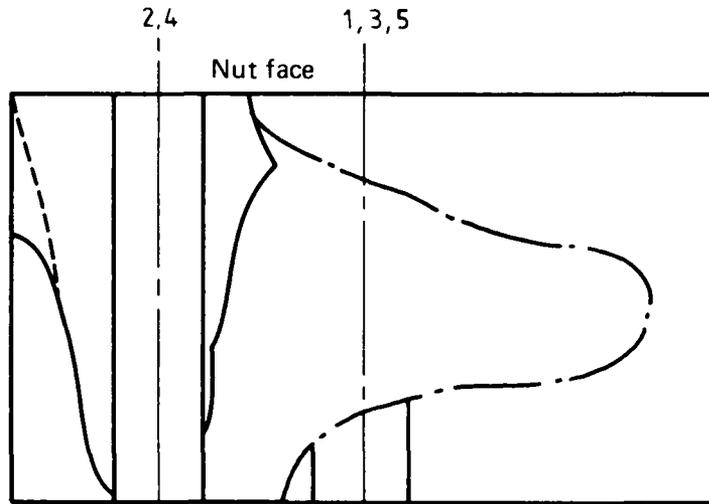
(a) FRACTURE SURFACES: SPECIMEN TYPE (C)
